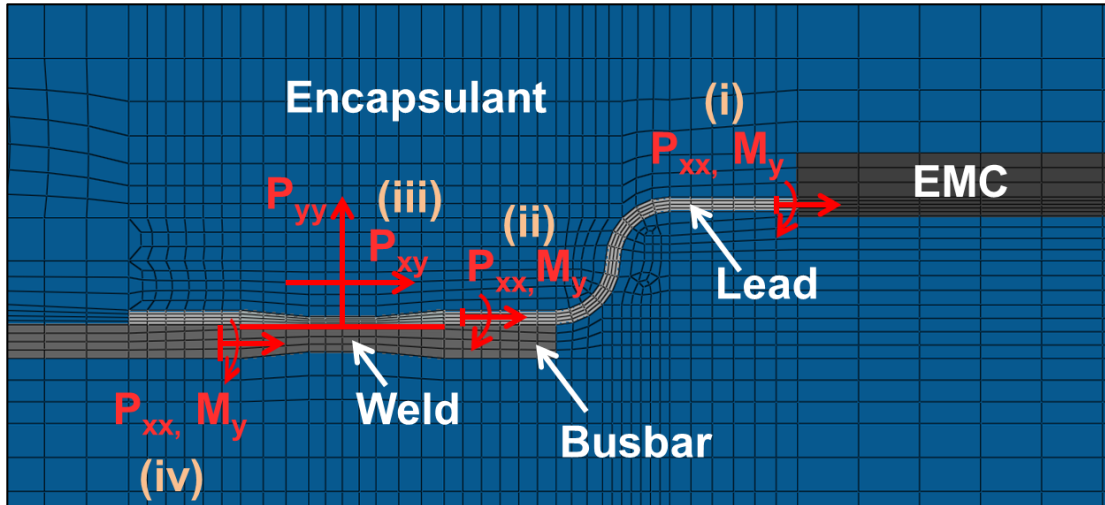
Local view showing the locations of force & bending moment measurements - (i) Lead adjacent to EMC (ii) Lead adjacent to weld (iii) Weld region (iv) Busbar adjacent to weld
